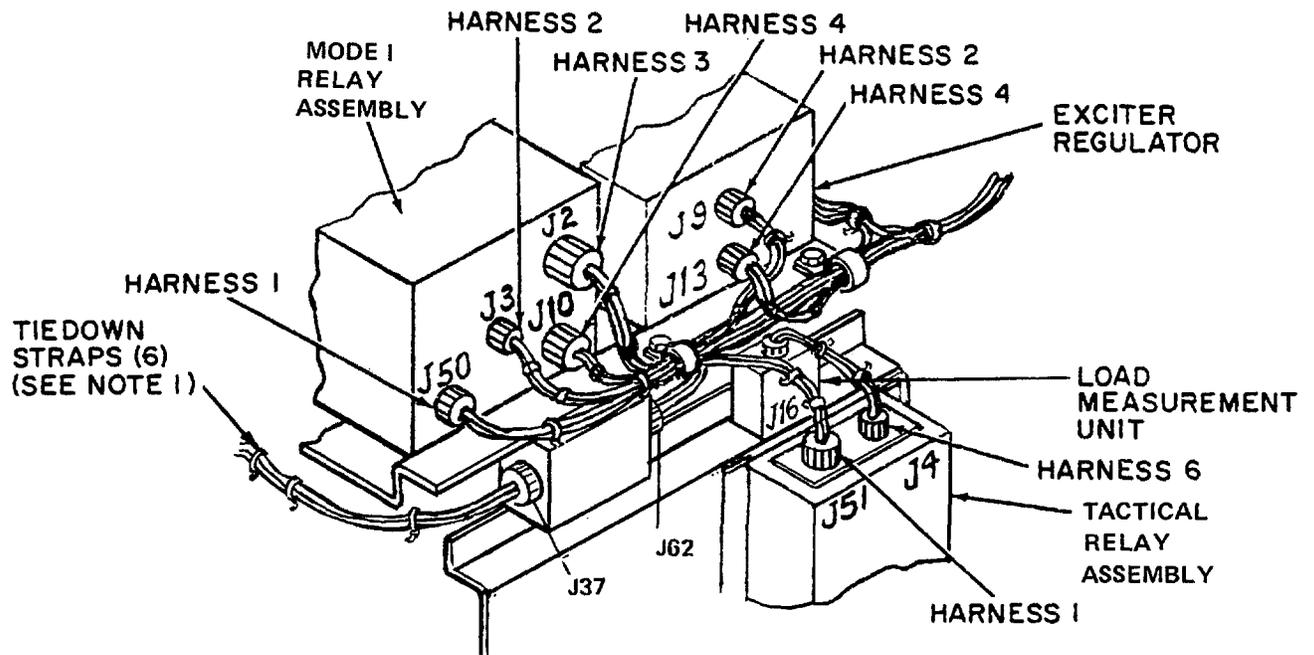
Wiring Harnesses, Removal and Installation (Sheet 1 of 5)
